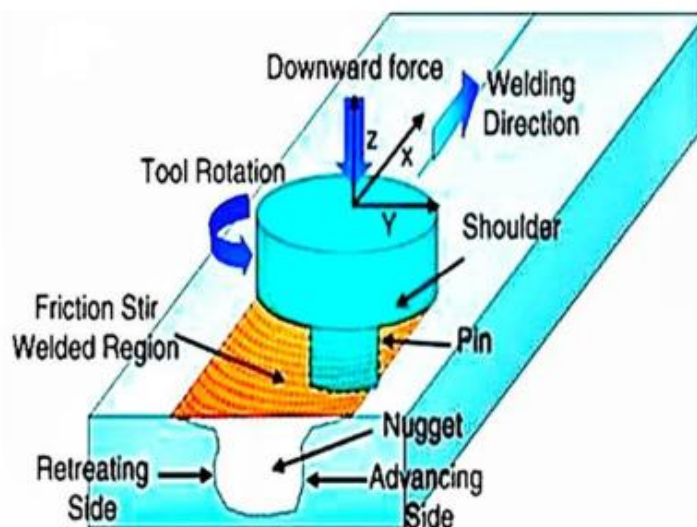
1: Schematic diagram of the Friction Stir Welding Process [1]
